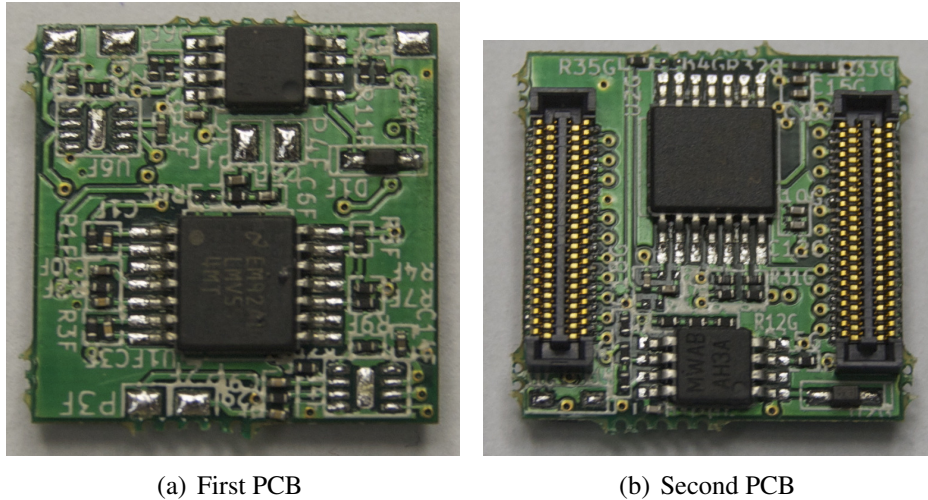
Interface Module Magnitude and Phase method – prototype 2 PCB layout. (a) first PCB (b) second PCB.
